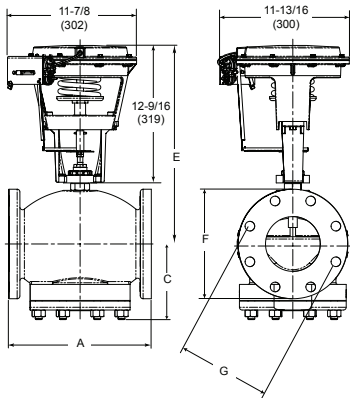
MK-6811 with Flanged 2-Way Globe Valves
